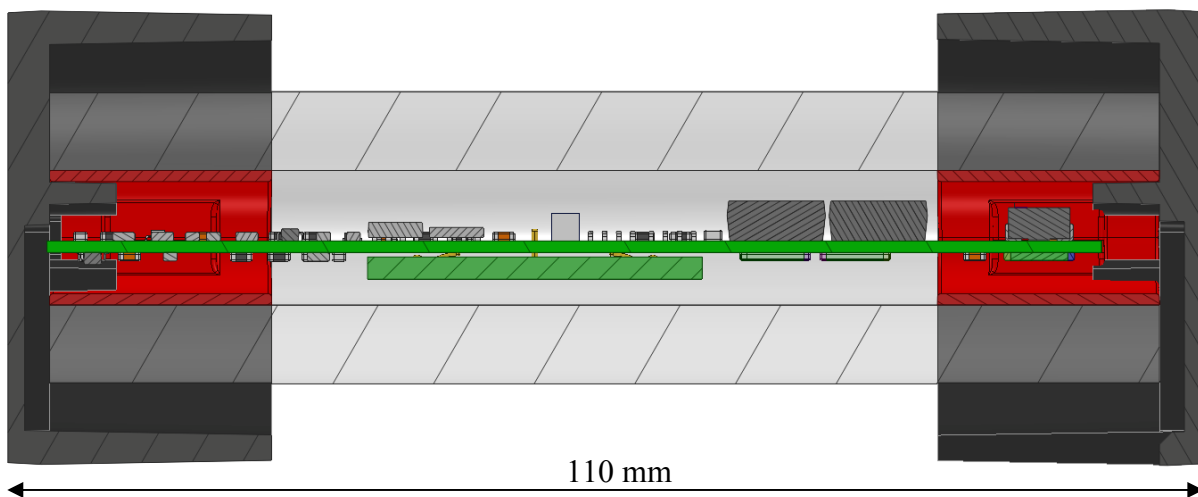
Cross section view of the DEAP actuator with integrated driver.
